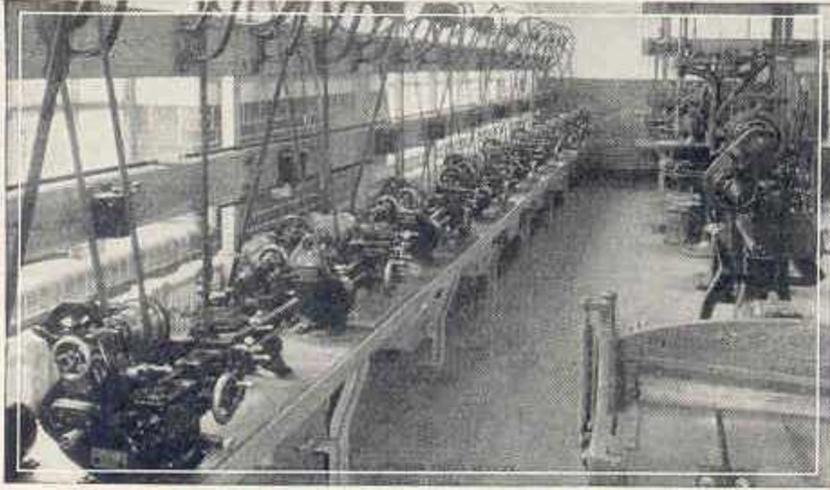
A Group of 9-Inch Junior New Model Lathes Illustrating a Practical Bench Lathe Installation.
